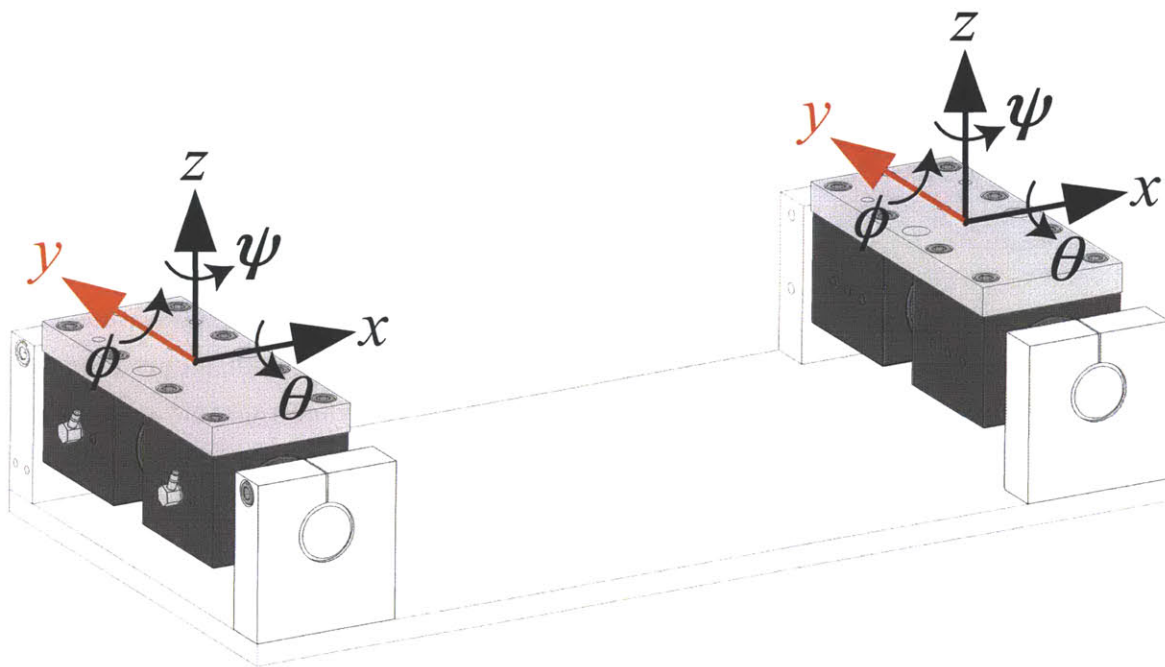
Print head construction: On each guide rod, there is a linear stage. Each stage consists of two collinear 1" air bushings mounted in aluminum pillow blocks that are connected by a 1/2" thick aluminum plate. These near-frictionless stages allow either side of the print head to move forwards and backwards with a total travel of 1".
